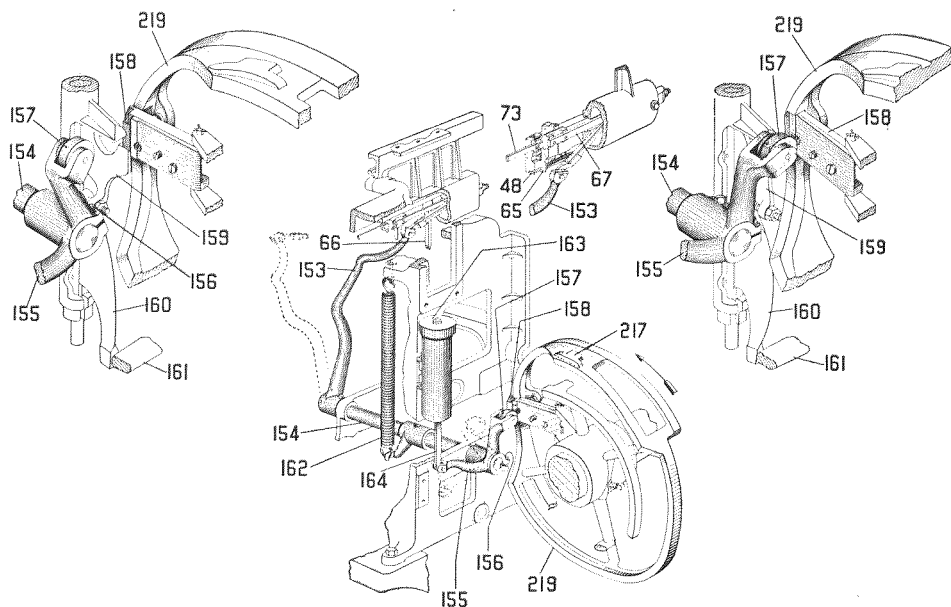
View of the automatic starting device, which causes one revolution of the cam shaft when the line of matrices is sent in to the first-elevator jaw. In this view 153 is the line-delivery lever. 154 is the shaft on which this lever is mounted. 155 is a short lever having two arms also mounted on the shaft 154. The lever 155 is adjustable through the bolt 156, which clamps the lever 155 upon the shaft 154. At the end of the lever 155 is a roll 157 which strikes upon the automatic pawl, 158. The starting pawl, 158, is pushed sideways off the automatic starting and stopping lever 159.
